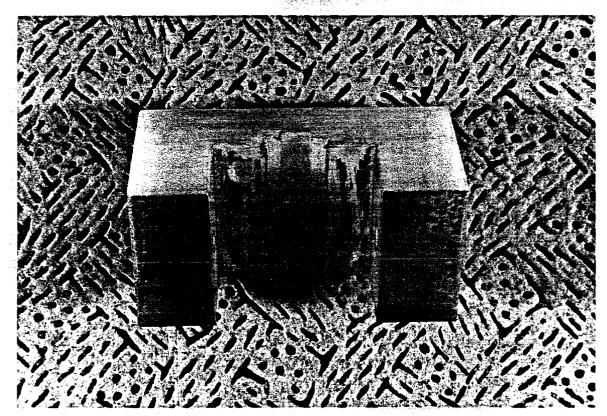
TNO P3/4 Head Transducer Mounting Block
